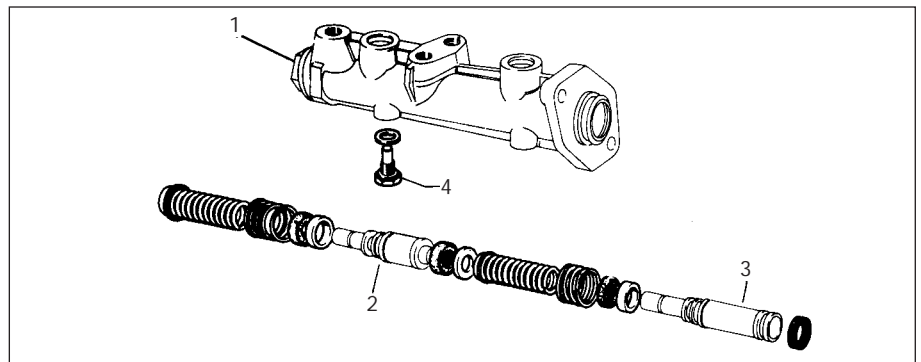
Exploded view of master cylinder (Sec 9)
